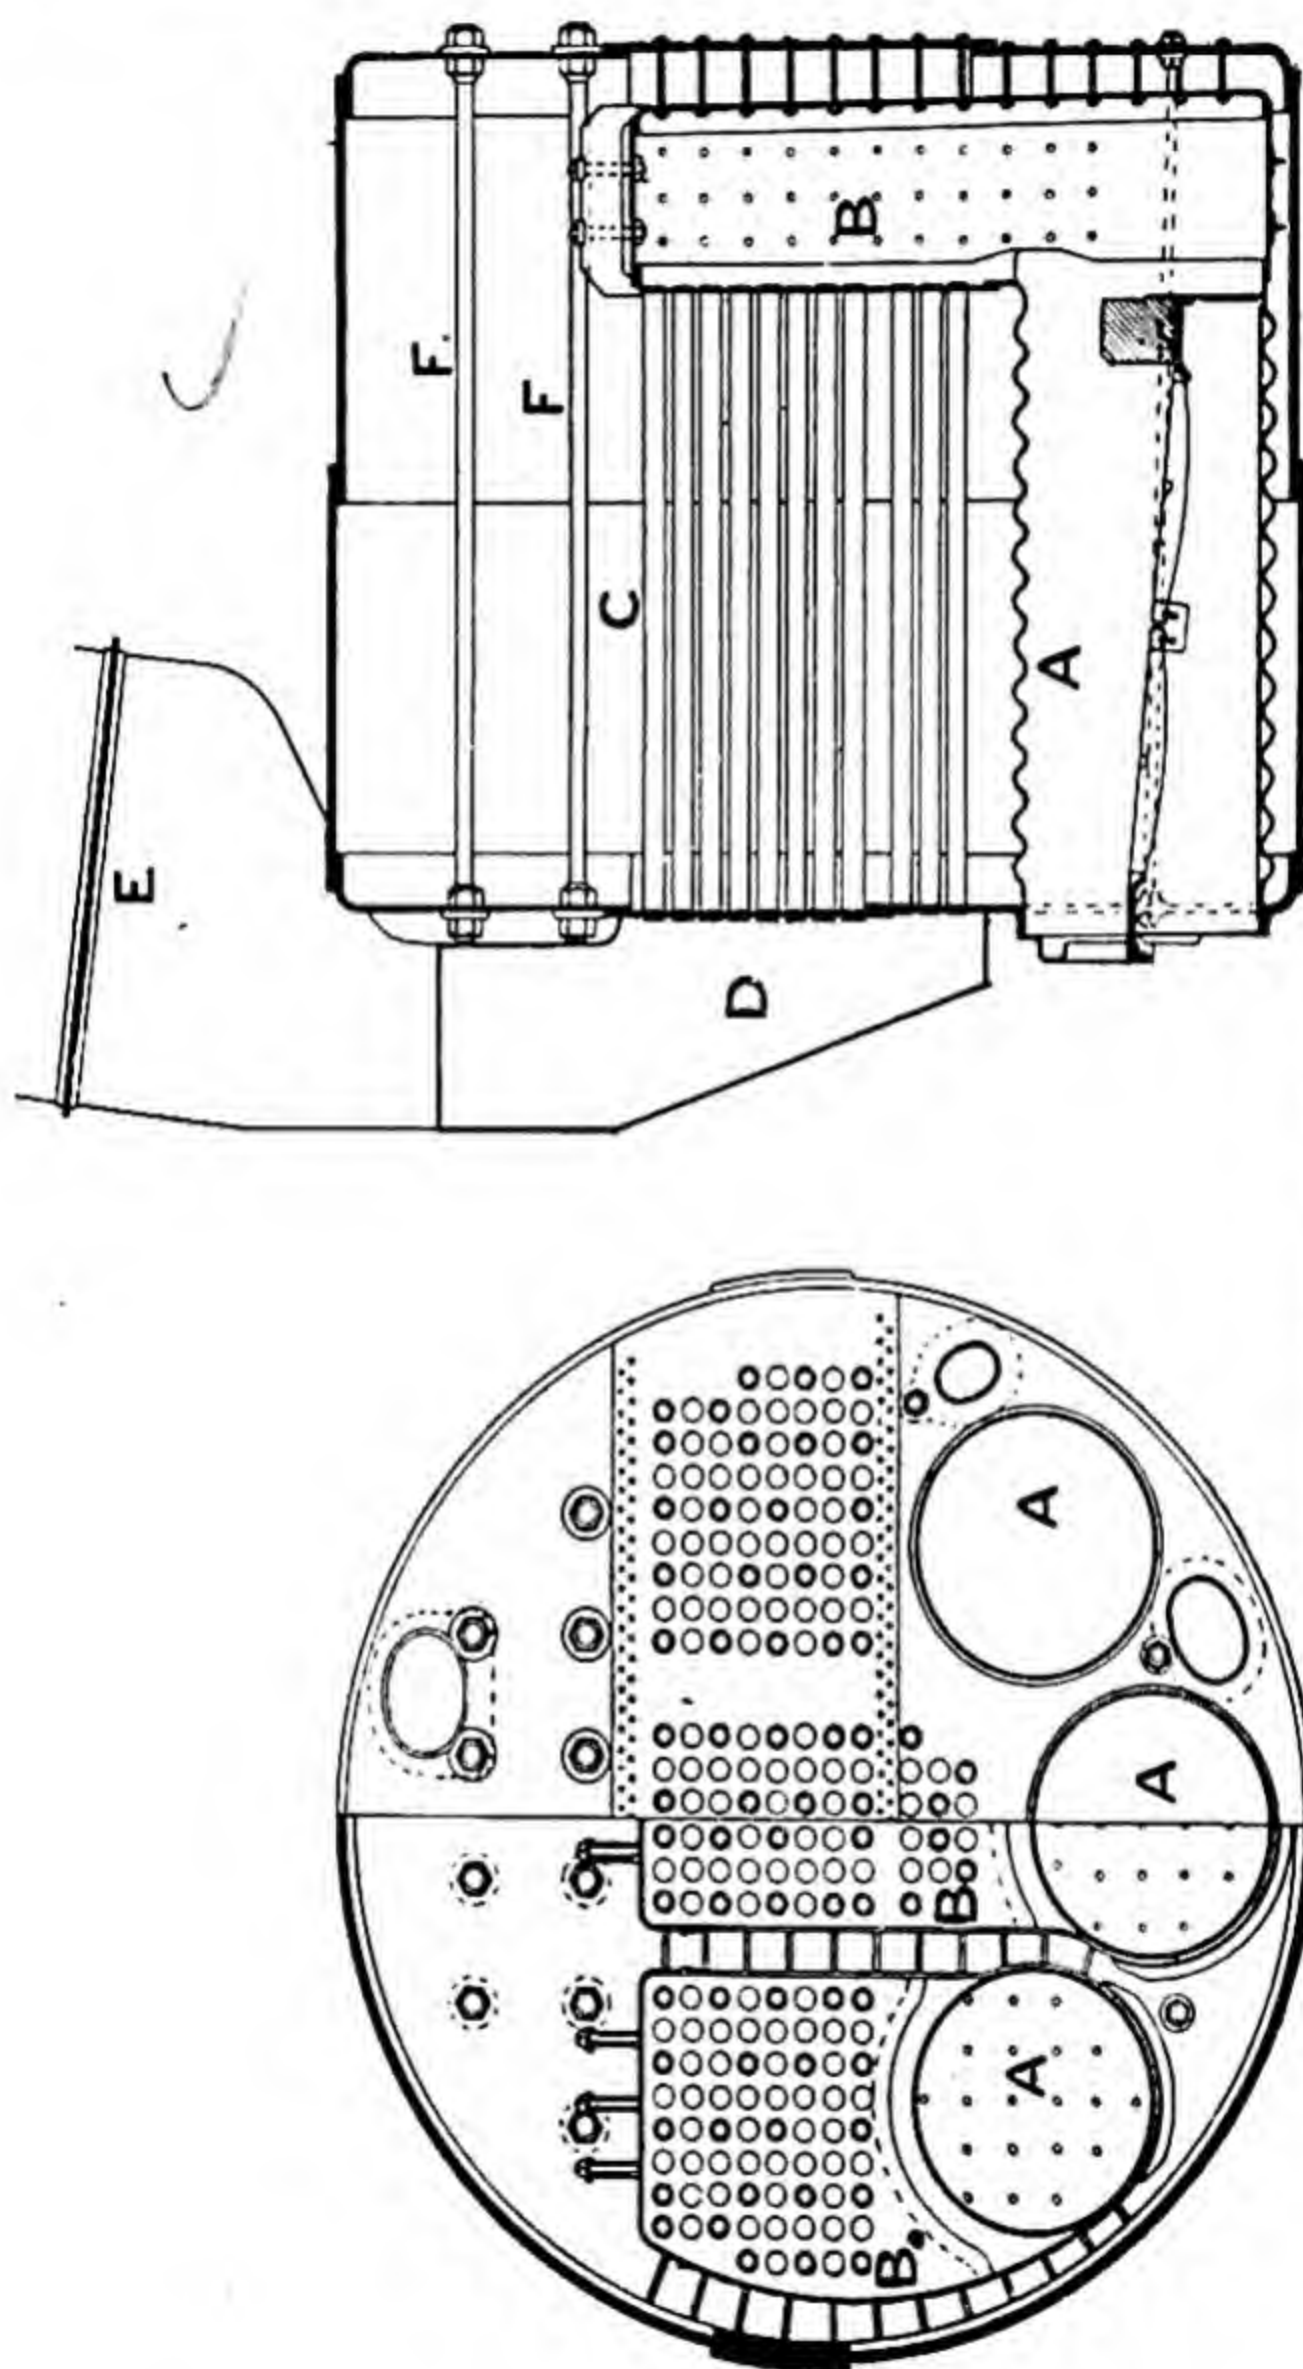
Sectional front elevation and longitudinal section of a return-tube marine boiler.
